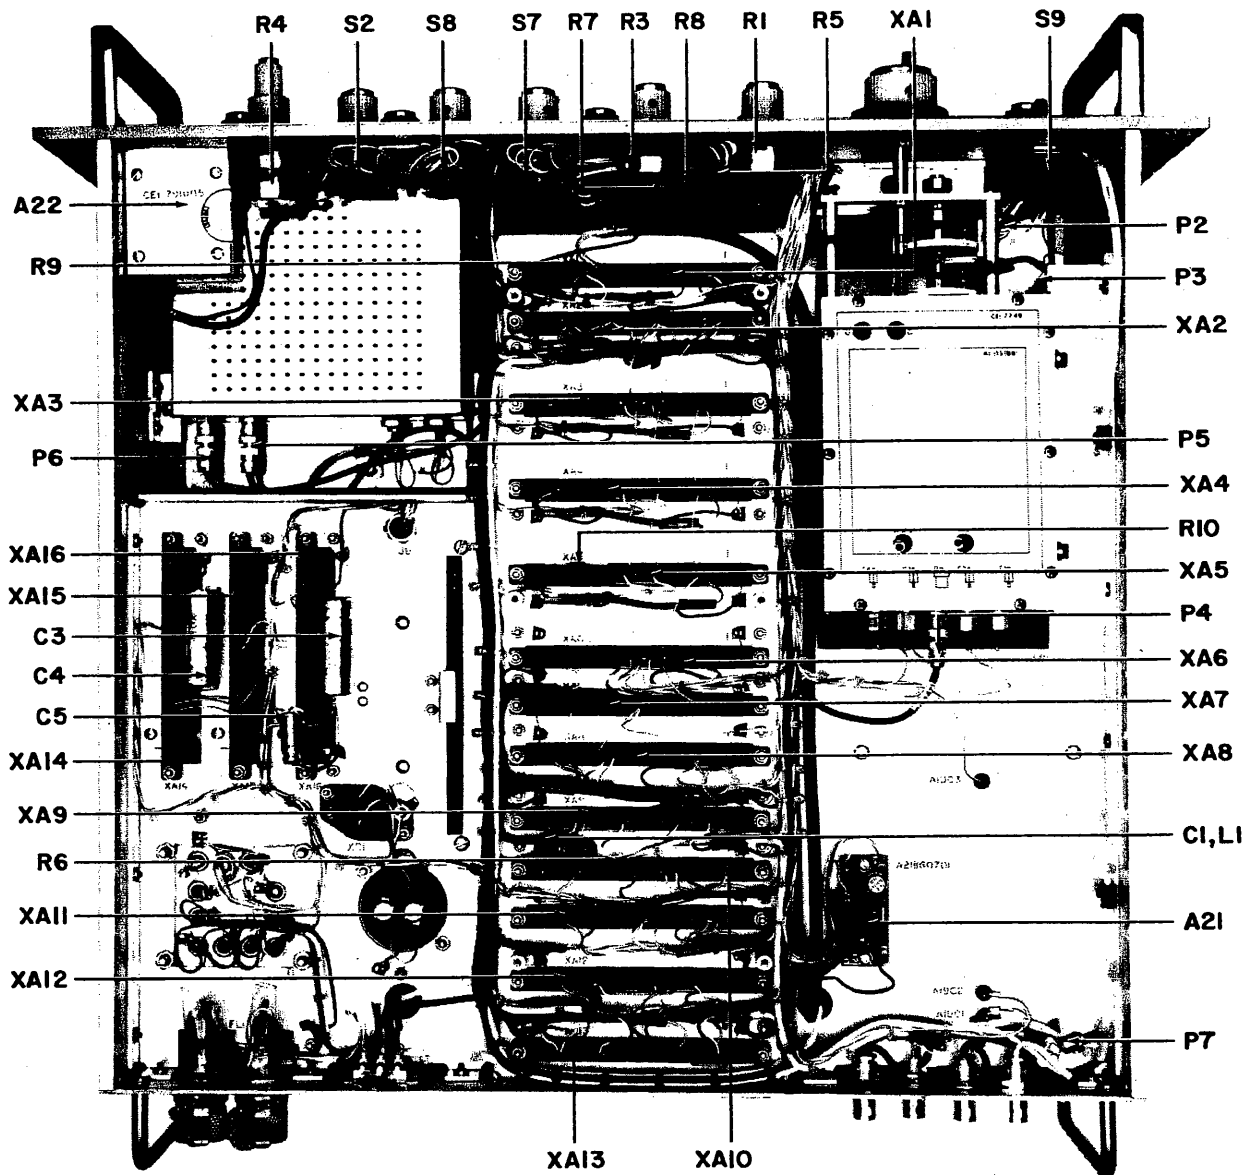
Type DMS-105R Demodulator, Bottom View
